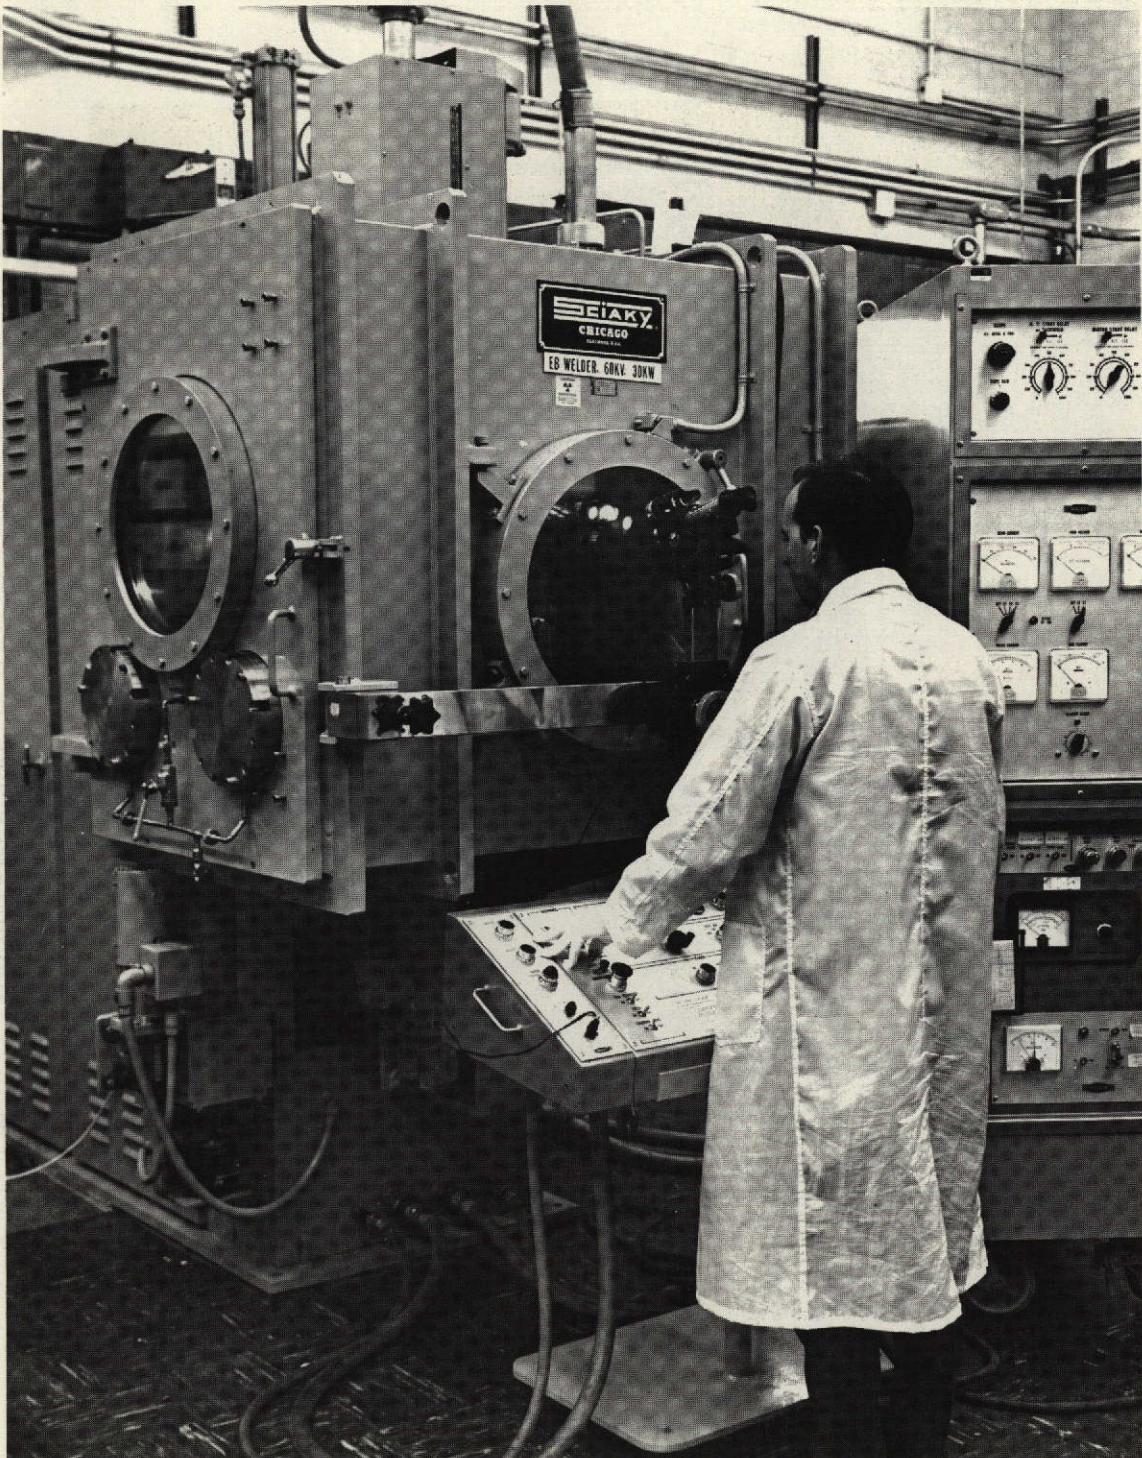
Sciaky Welding and Assembly Chamber External Arrangement
